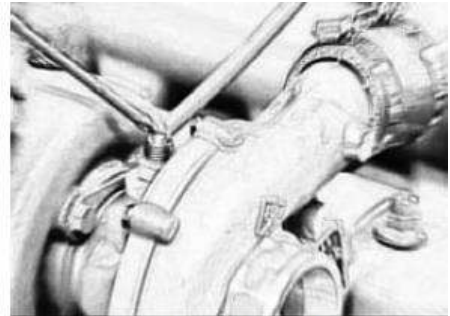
Turbo-charger Oil Inlet Pipe Installation
